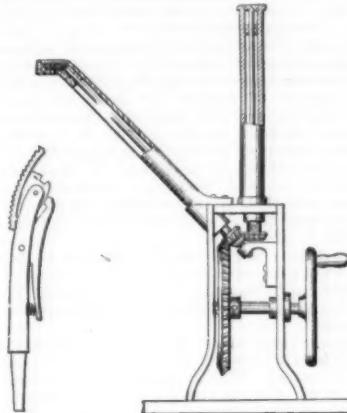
FLOAT. FIG. 3.—PEG-CUTTING MACHINE.
